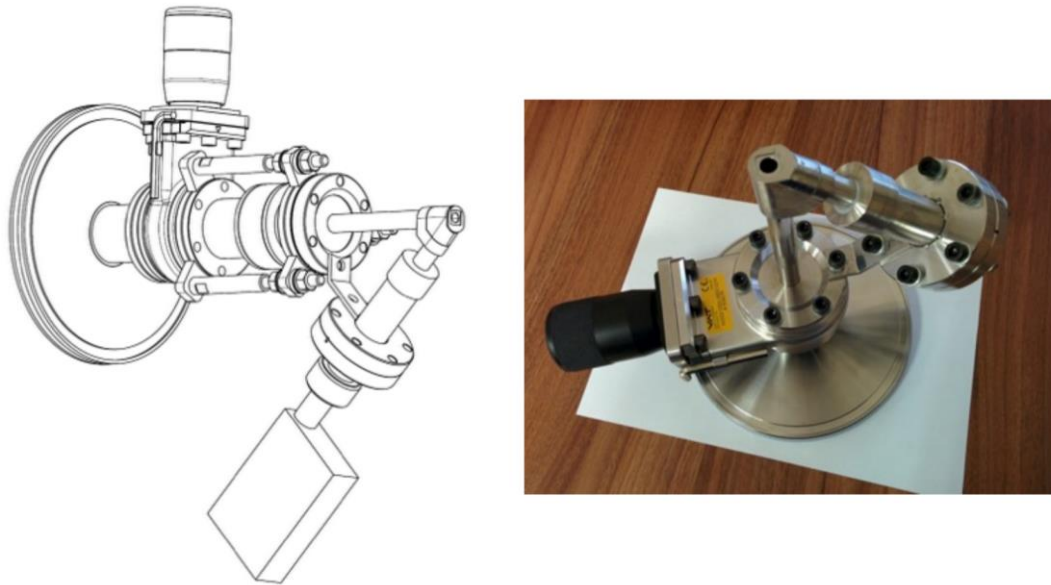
Beam extraction setup; left: CAD model, right: constructed assembly
